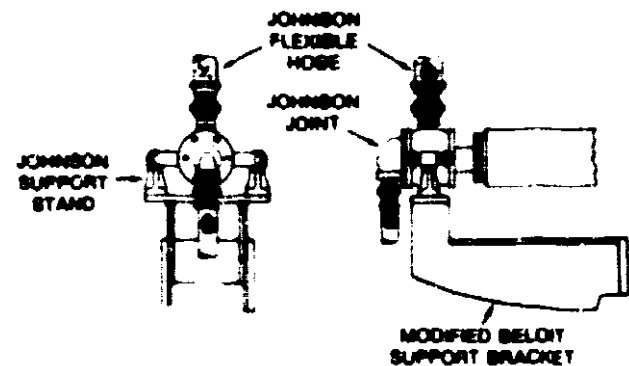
Suggested installation of Type N Johnson Joint with Quick Release Nipple, Johnson Support Stands, Support Rods and Flexible Hose on Beloit enclosed gear Paper Machine Dryers. Note modified Beloit support bracket.
